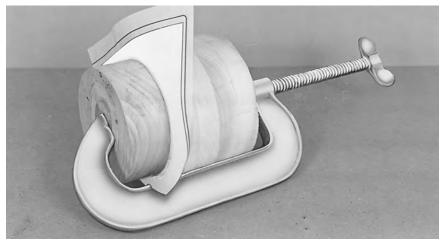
Glue a scrap block and your turning stock together, center-to-center. Put a piece of paper (brown craft paper or grocery sack) between them as shown.
